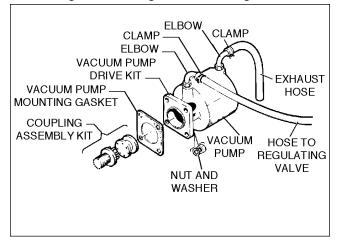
PA-28-151, Warrior and PA-28-161, Warrior II Vacuum Pump
